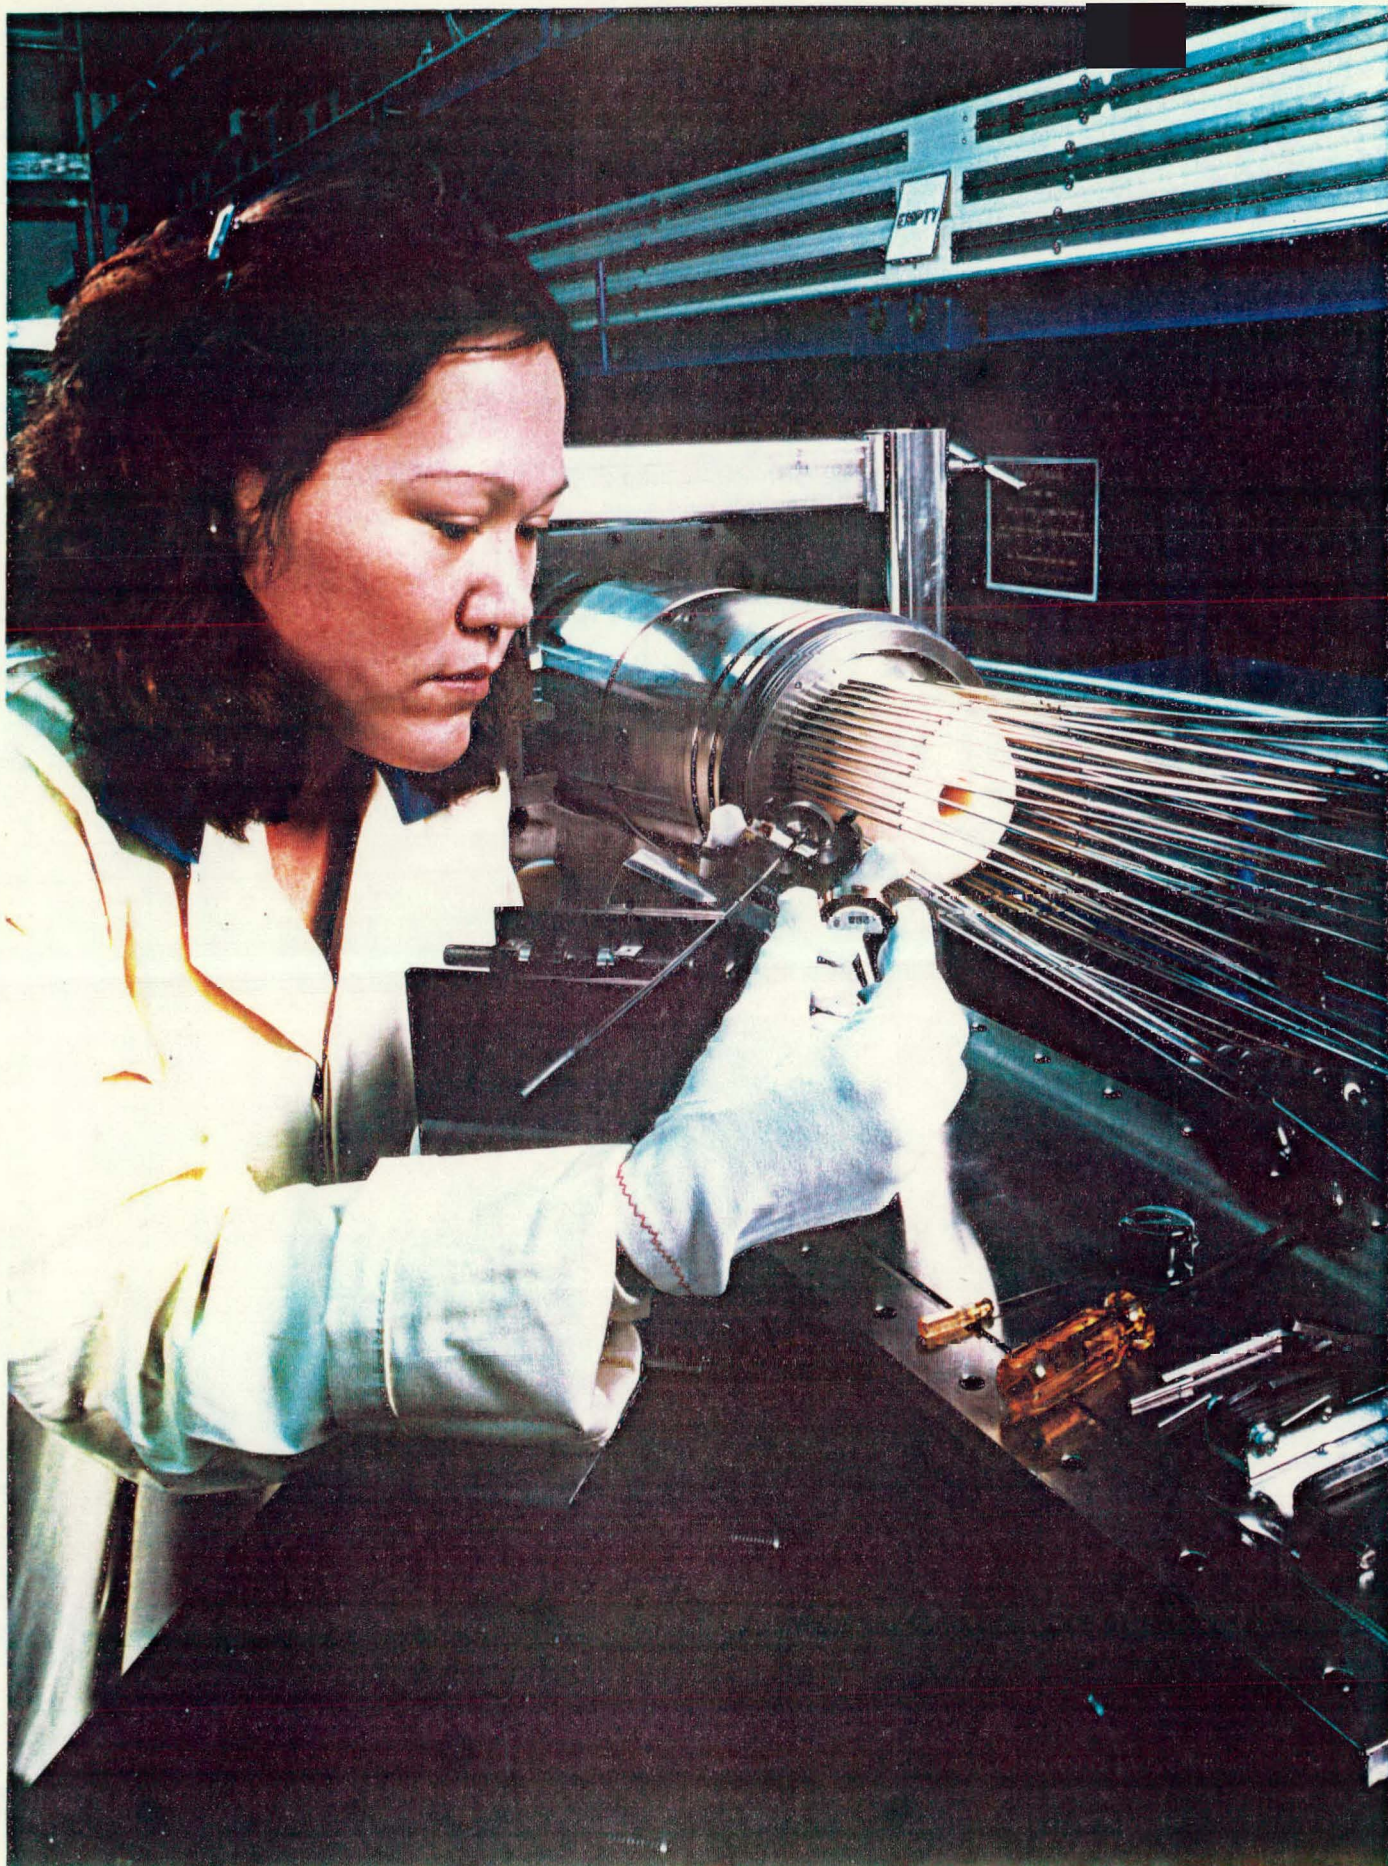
PERFORMING THERMOCOUPLE PRESSURE BOUNDARY WELD
